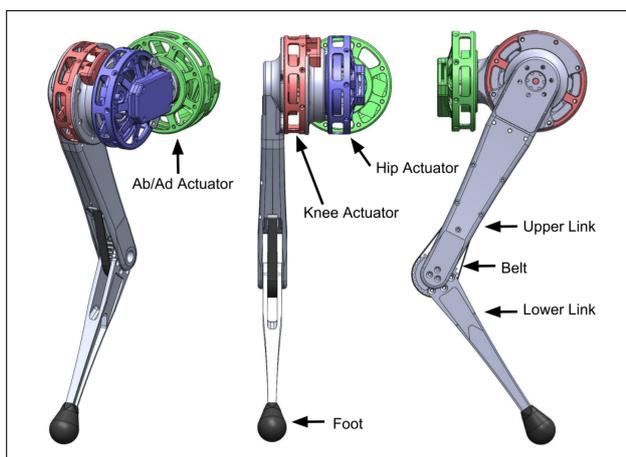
MIT mini Cheetah leg CAD design [Kim et al. \[2019\]](#)
